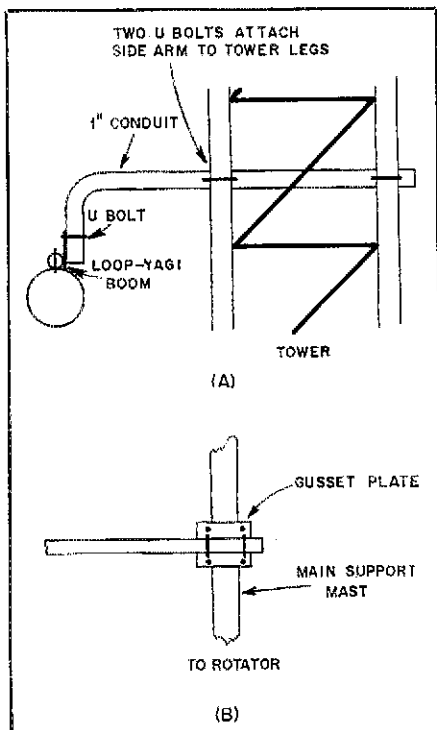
Suggestions for a fixed (A) or rotatable (B) mounting.
